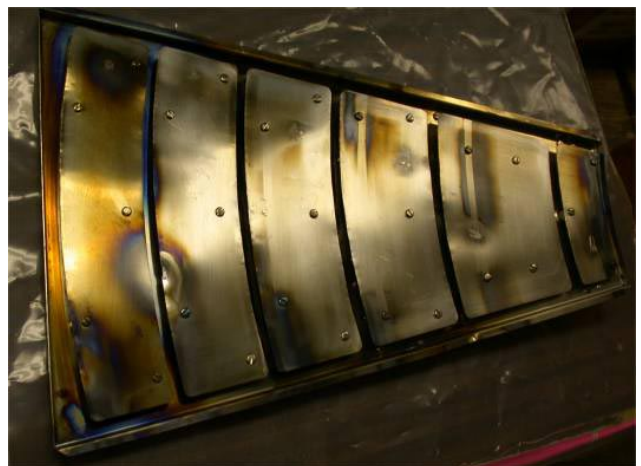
Q1 correction plates. Notice beam damage spot on the left.
